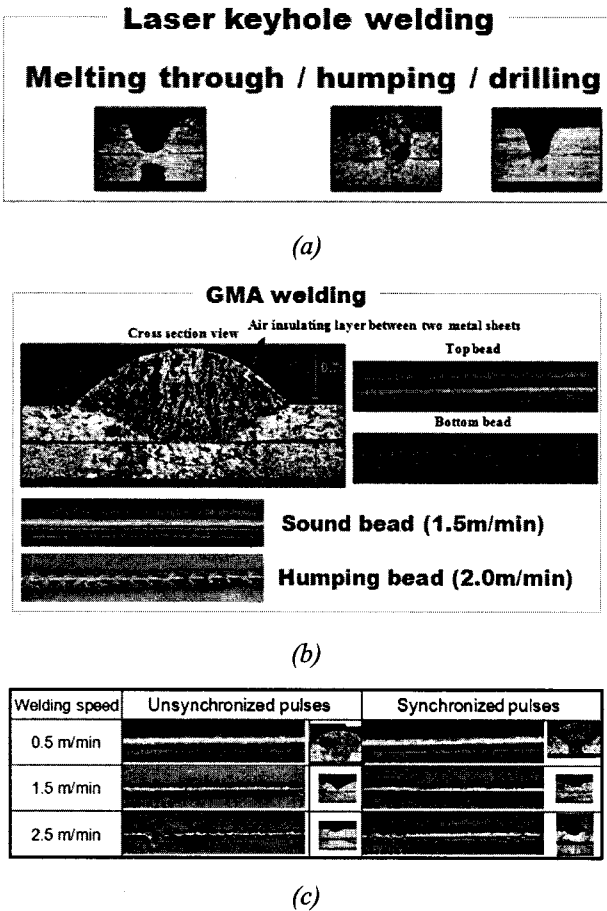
3D Lap-joint weld shape in laser keyhole welding(a), dip-transfer DC GMA welding(b), and pulsed laser-dip-transfer DC GMA hybrid welding w/ and w/o pulse control technique(c)
